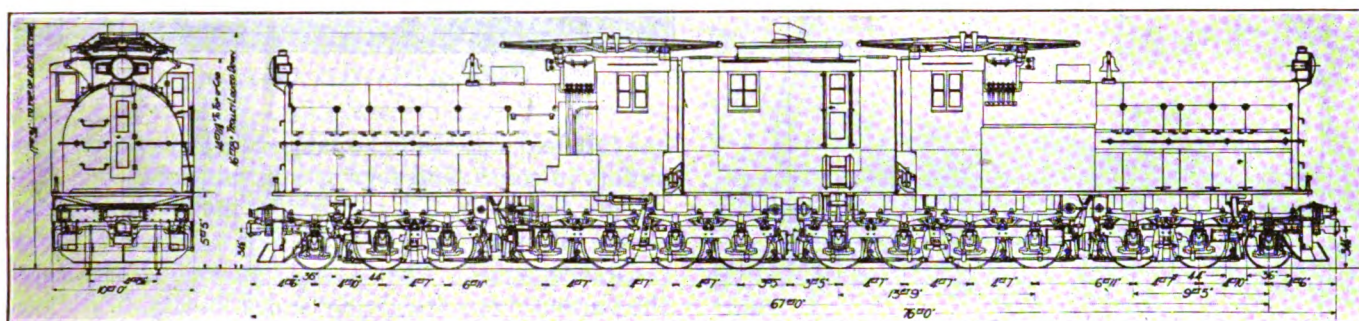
OUTLINE DRAWING AND DIMENSIONS OF LOCOMOTIVE
